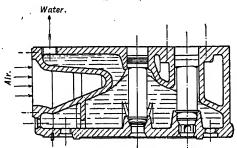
Section through Cylinder Head having Valve Chambers separate and secured in the Casting (Tosi).
